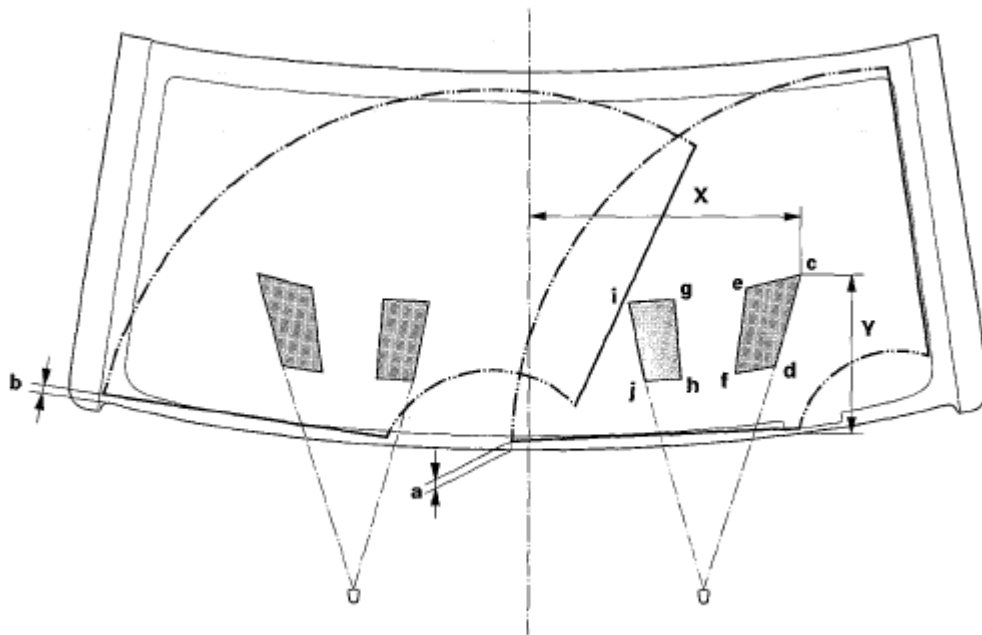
Identifying Wiper Arm/Nozzle Position - Front
